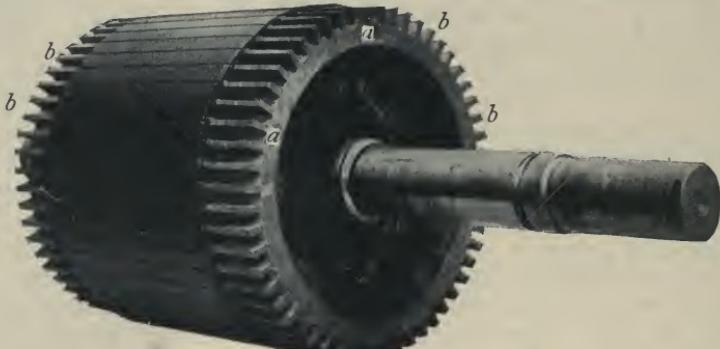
Johnson and Phillips' Squirrel Cage Rotor.
